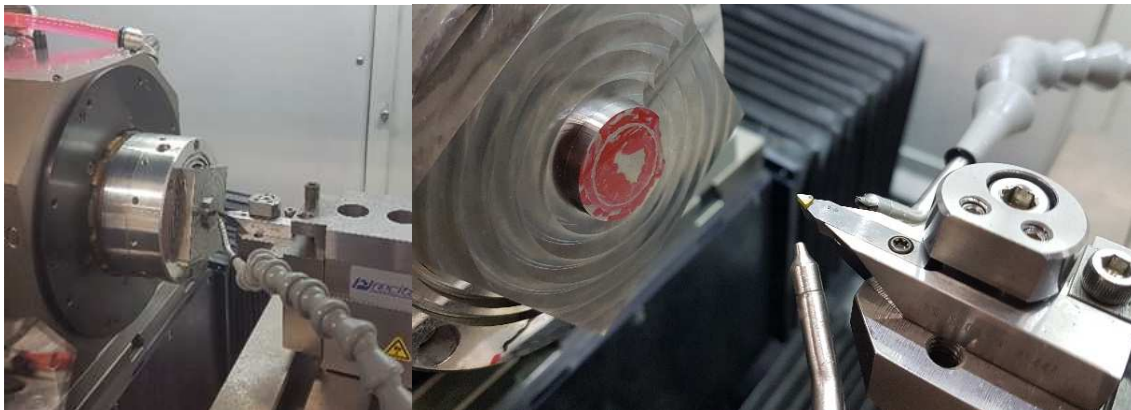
Mold parts (upper mold part already with diamond cut microlens array)
